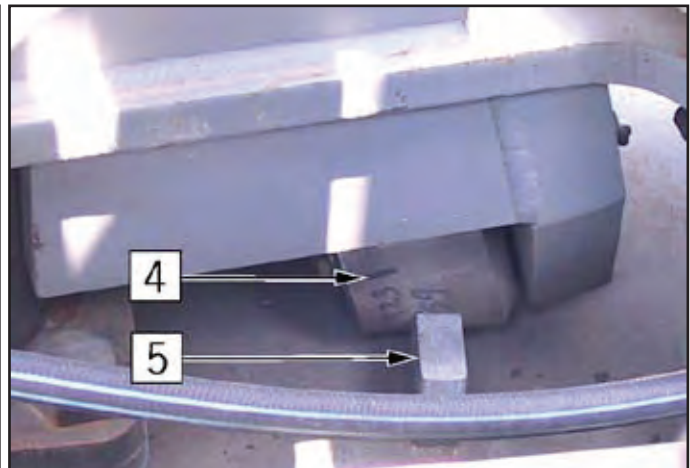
Pipe Rack Roller (viewed from mast pivot end)
